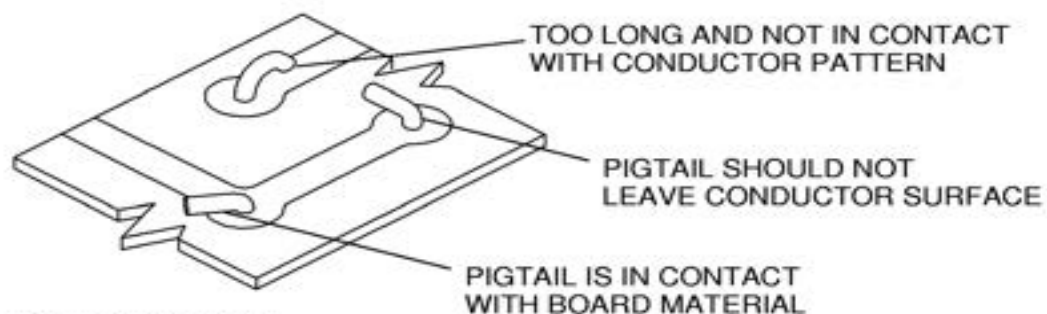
Sheet 2 : Installing Components on Printed Circuit Boards
